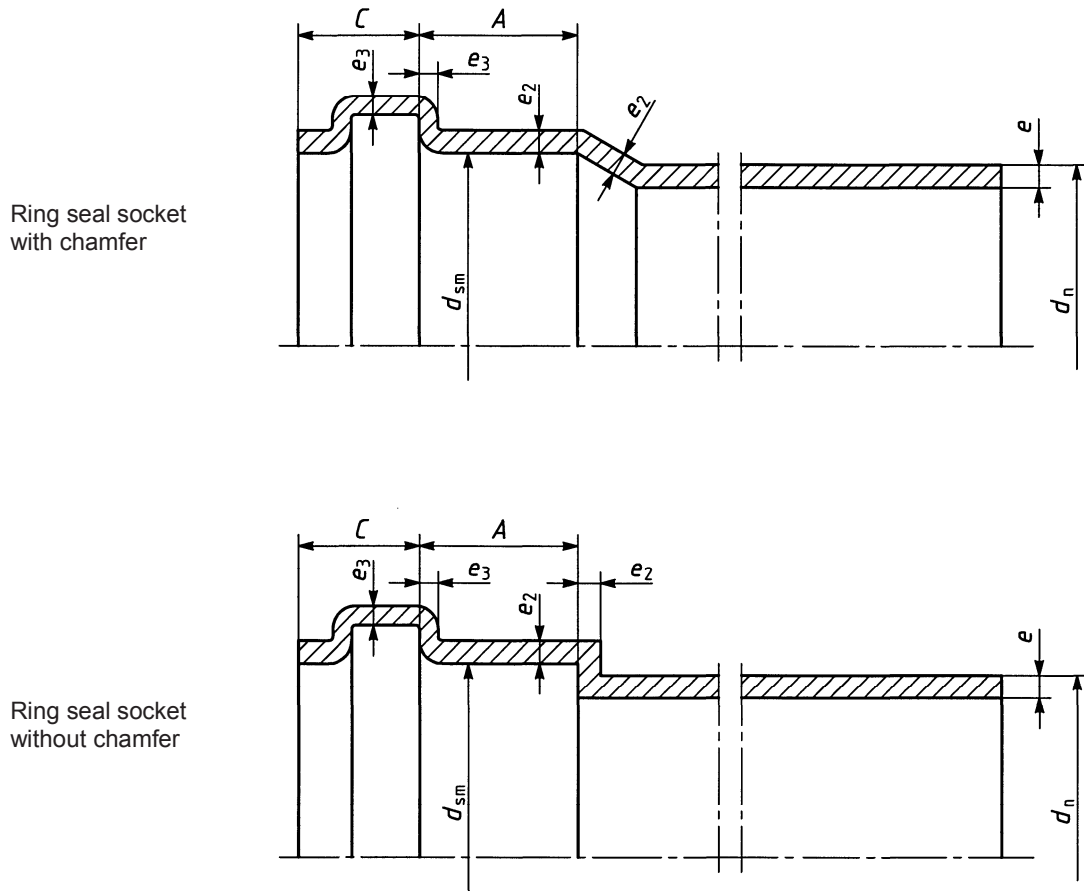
Dimensions of sockets for elastomeric ring seal joints
